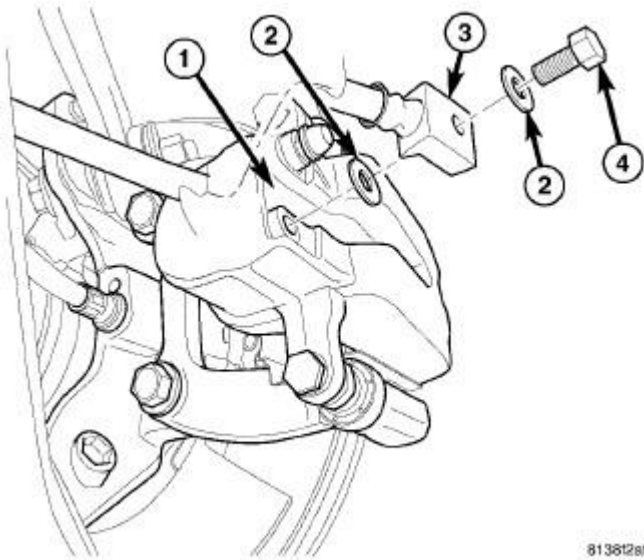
FLEX HOSE CONNECTION AT REAR CALIPER
